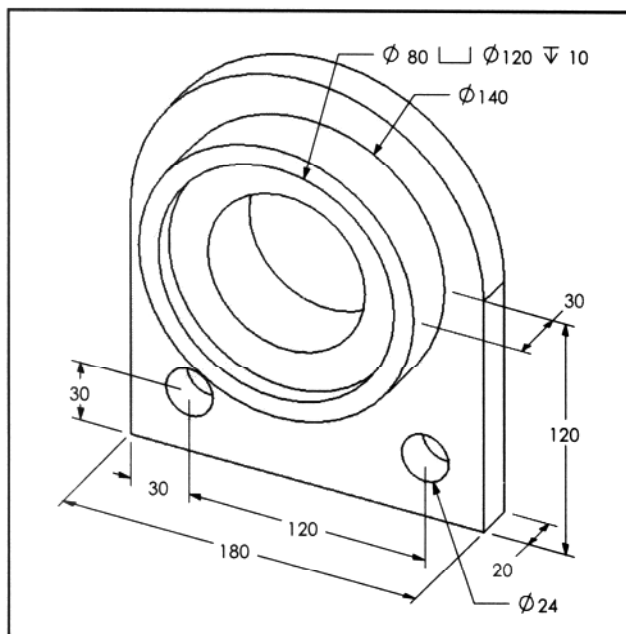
The front-right-top trimetric pictorial of a retainer. Units are millimeters.
